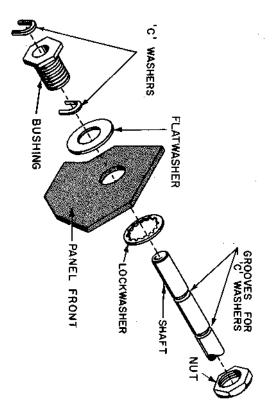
ANTENNA CONTROL ASSEMBLY
